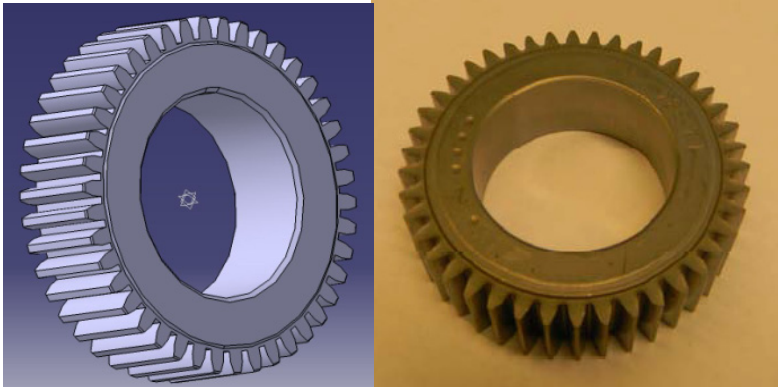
Configuration of the Astaloy 85Mo+0.5%C camshaft spur gear.
